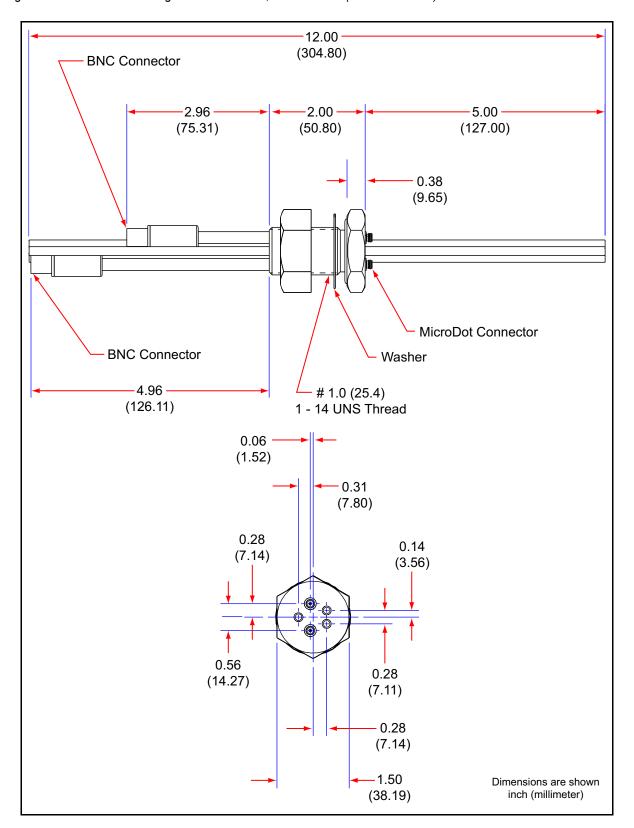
1 in. bolt feedthrough with two tubes, one electrical, with Ultra-Torr (PN 750-624-G1)
